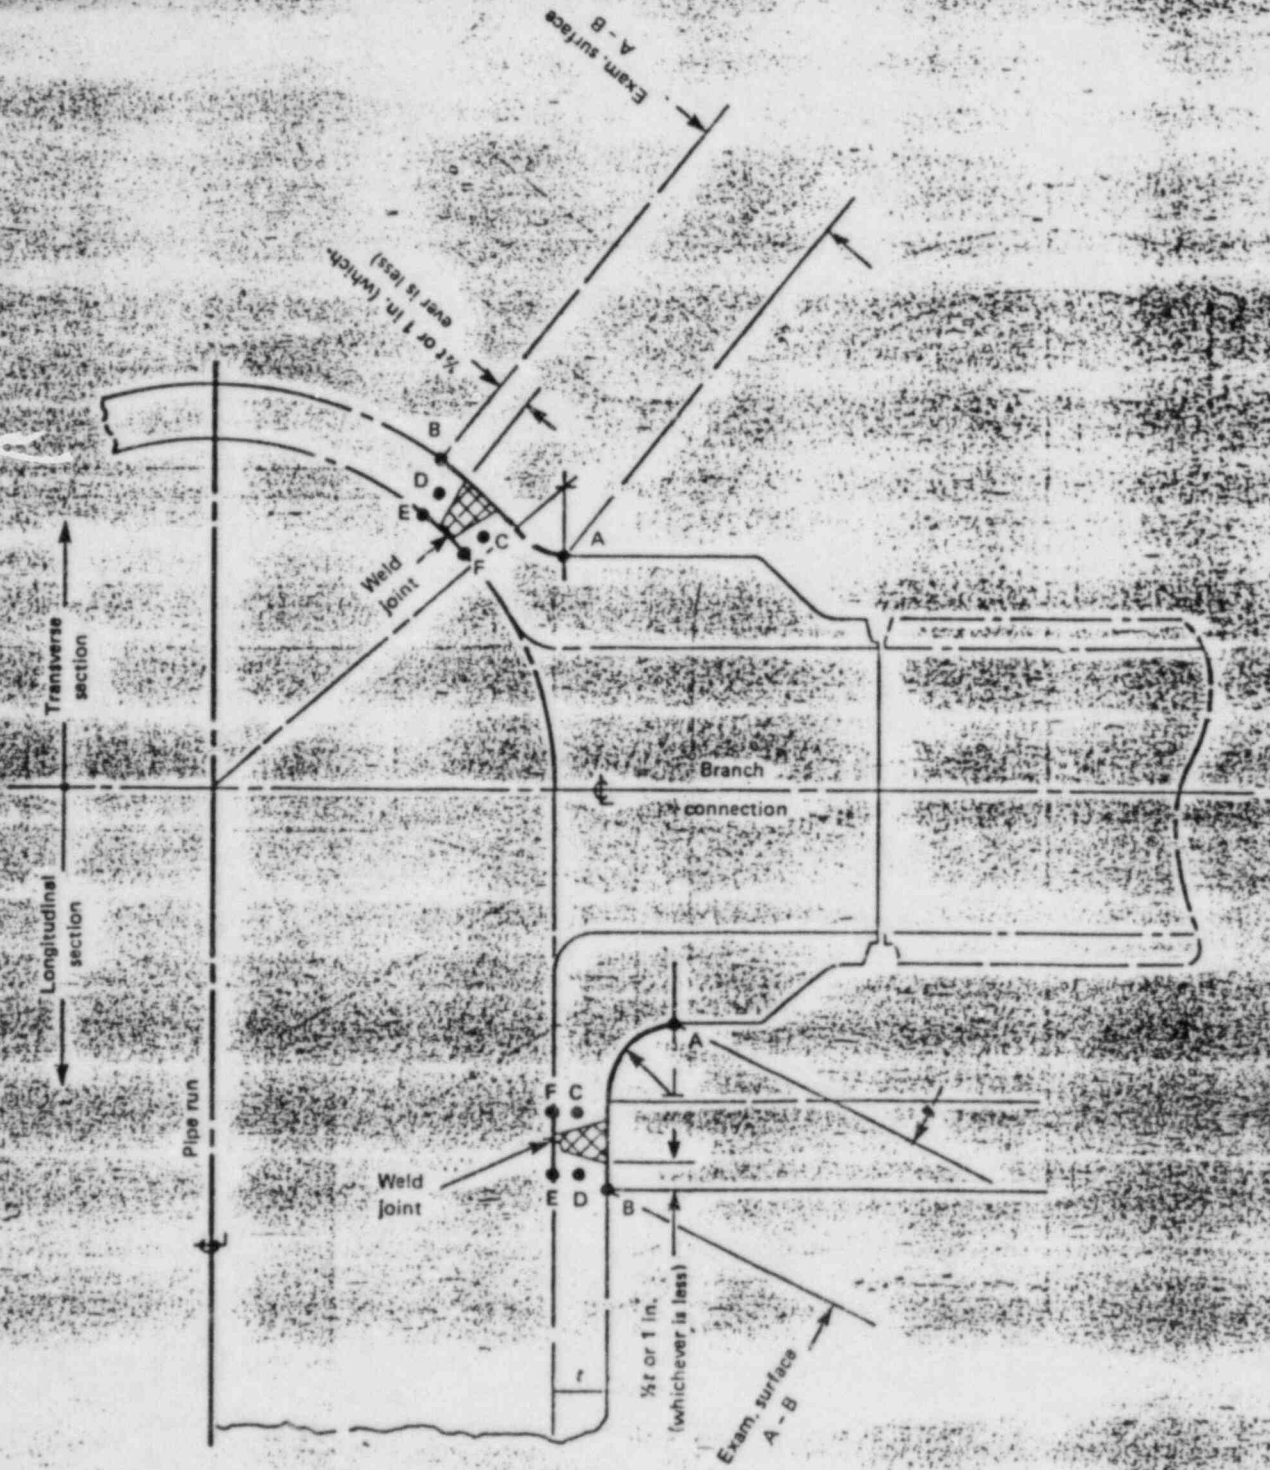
SIMILAR AND DISSIMILAR METAL WELDS IN COMPONENTS AND PIPING
